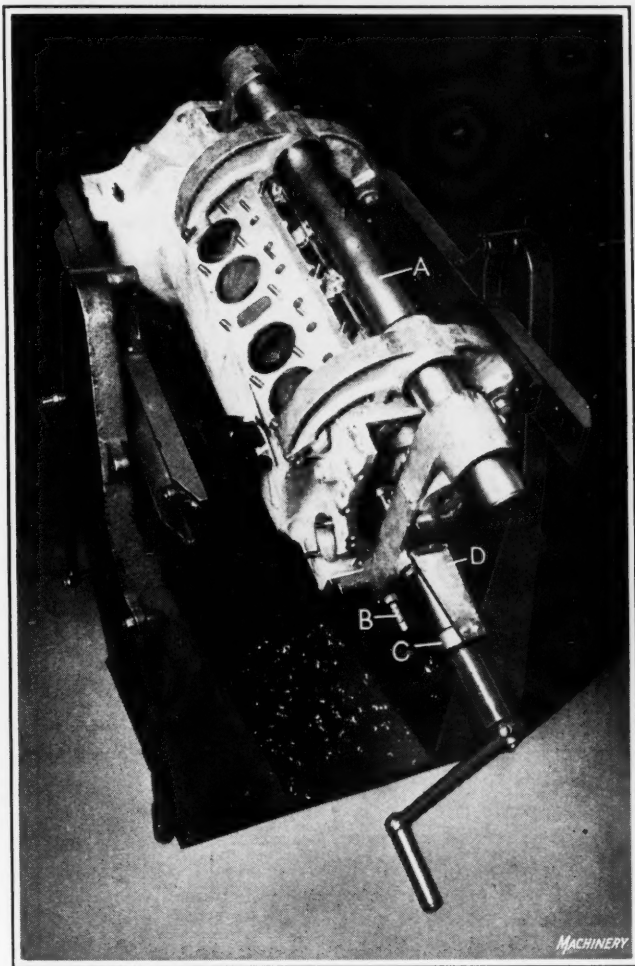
Boring-bar and Fixture used for refitting Main Bearings of Crankcases
